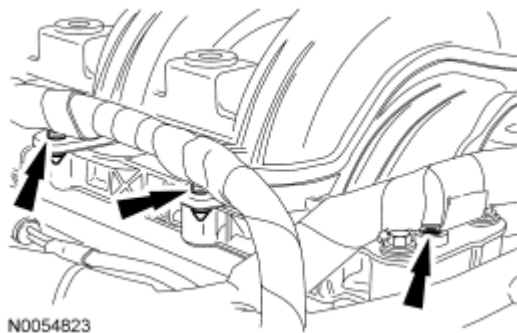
Locating Wiring Harness Retainers From Upper Intake Manifold
